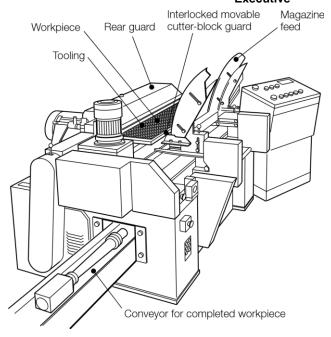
Automatic rotary knife lathe with interlocked movable cutter-block guard and guard locking
